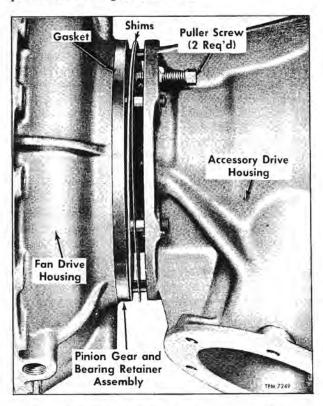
Shims Installed Between Accessory Drive Housing and Pinion Gear Retainer
